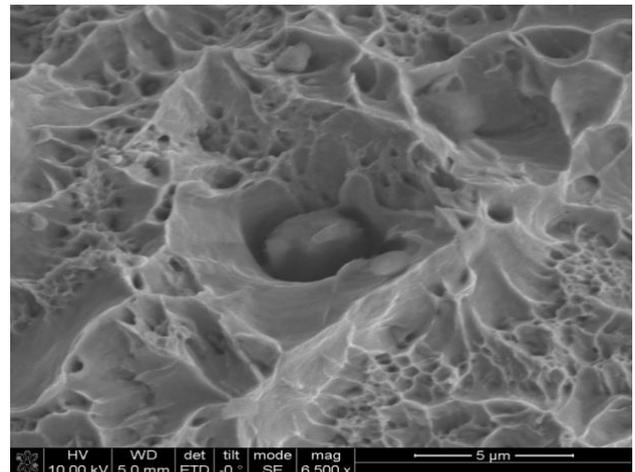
Fractograph of B790: Structure reveals dimple fibrous fractured surface.
